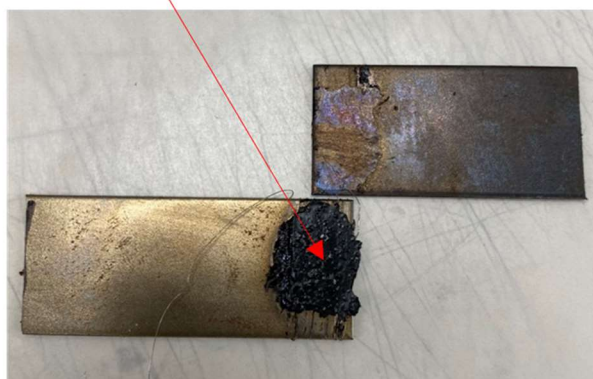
Typical appearance of easily broken tensile shear test specimen of dismantlable adhesive after heat treatment at 250℃ for 5min.
